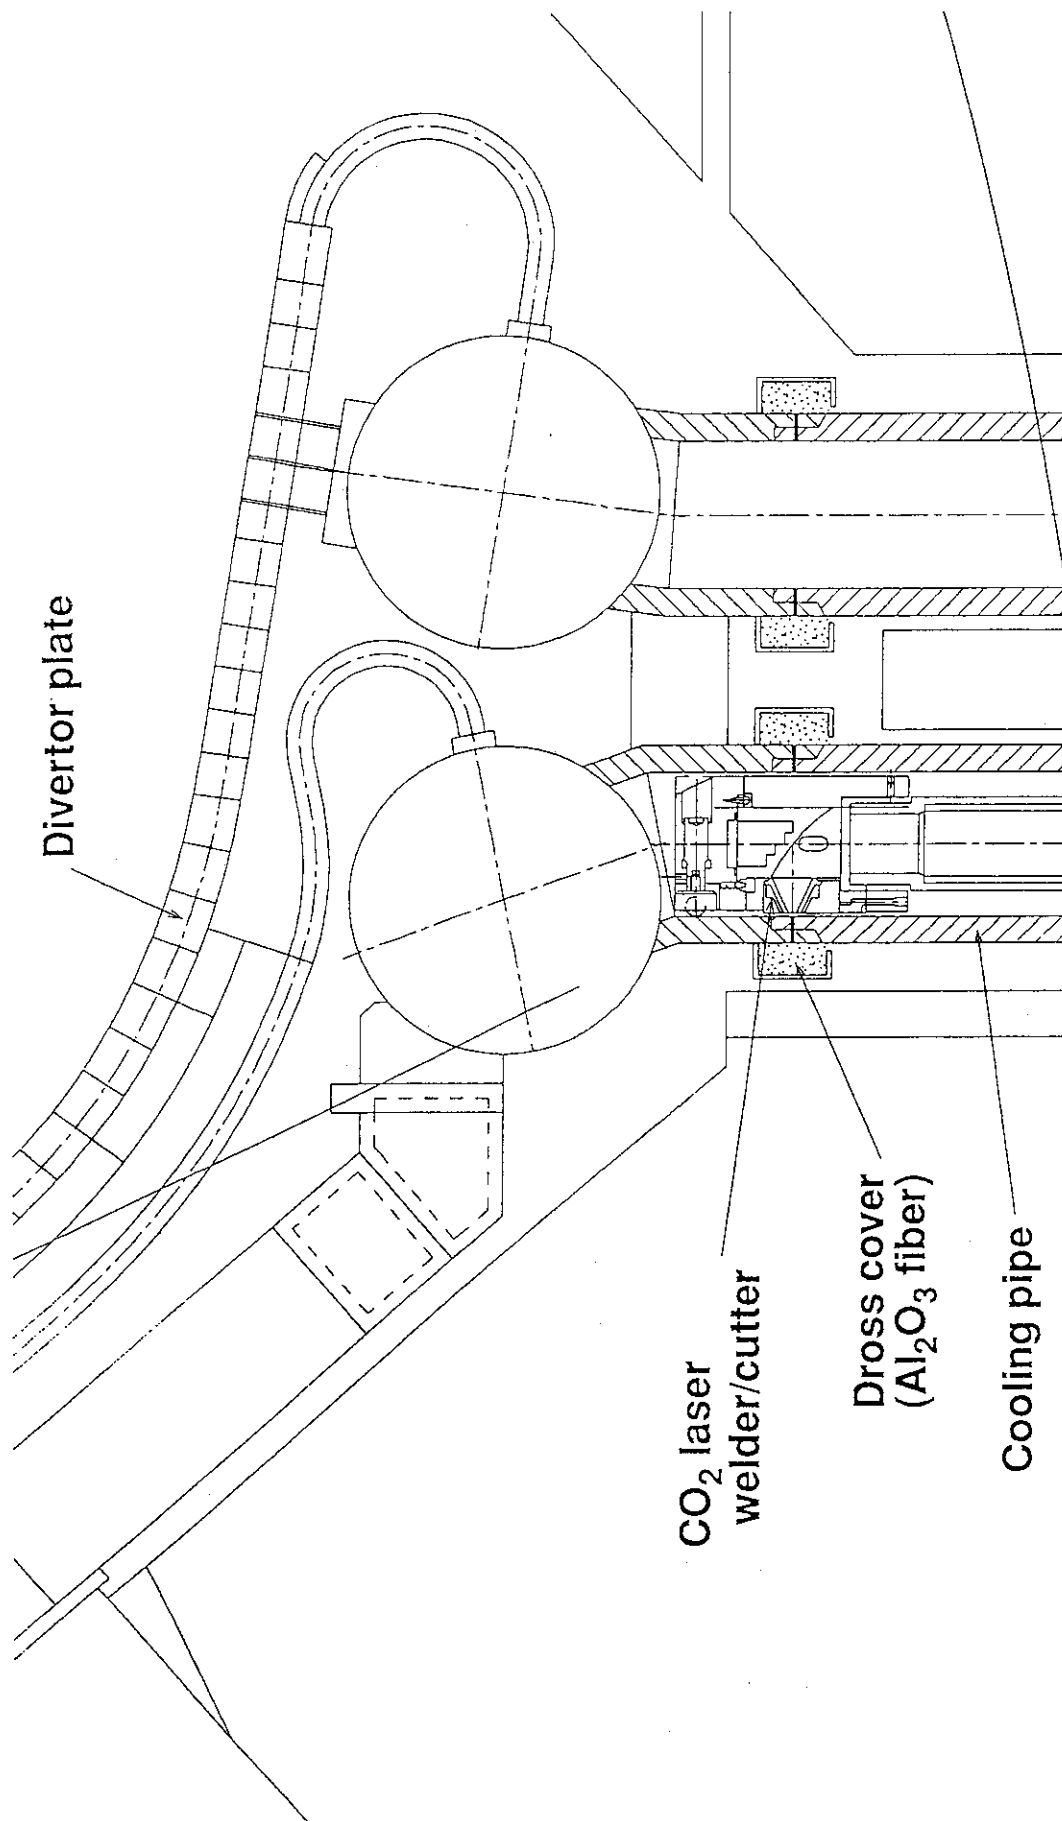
Schematic drawing of CO₂ laser welder/cutter (Internal access)
